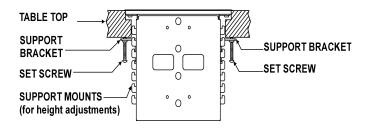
Attachment of the PNP202 to the table using support brackets and set screws
